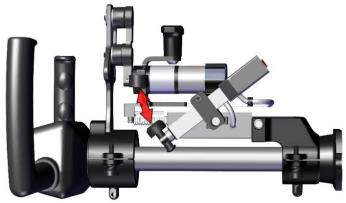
Rotation of elevator actuator to engage / disengage magnetic coupler
